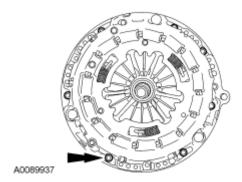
Locating Clutch Pressure Plate Bolts Courtesy of FORD MOTOR CO.
